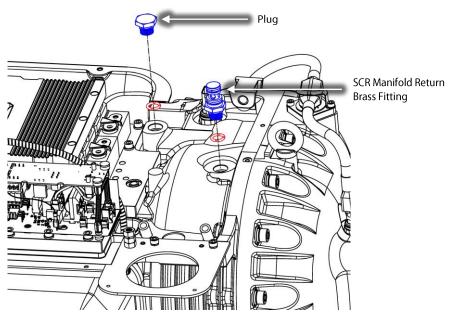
Plug and SCR Manifold Return Brass Fitting Removal
